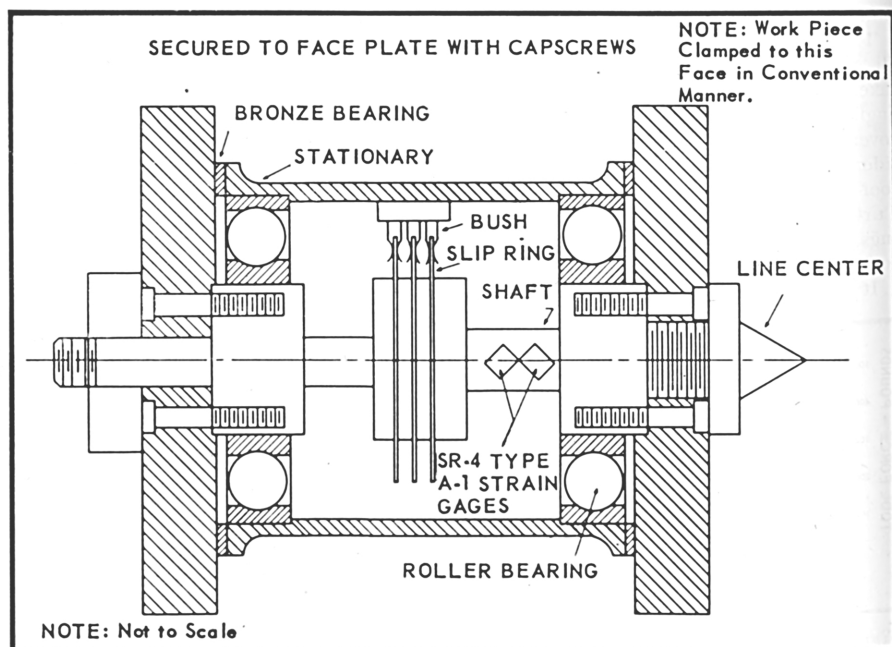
Assembly drawing of torsional dynamometer. See Figure 11 for a photograph of the torsional element.
